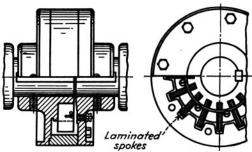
In another design by Brown Engineering Company, a series of laminated spokes transmit power between the two flanges without setting up end thrusts. This type allows free end play. Other advantages are the absorption of torsional shocks, no exposed moving parts, and good balance at all speeds. Wearing parts are replaceable and working parts are protected from dust.
